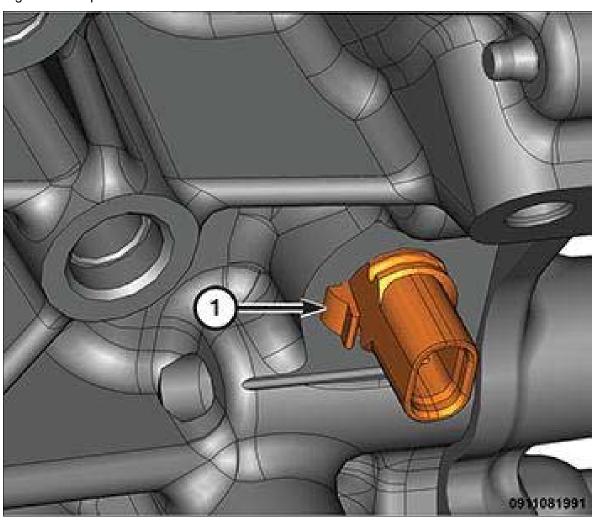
Oil Pump Solenoid Electrical Connector Retention Lock Tab
